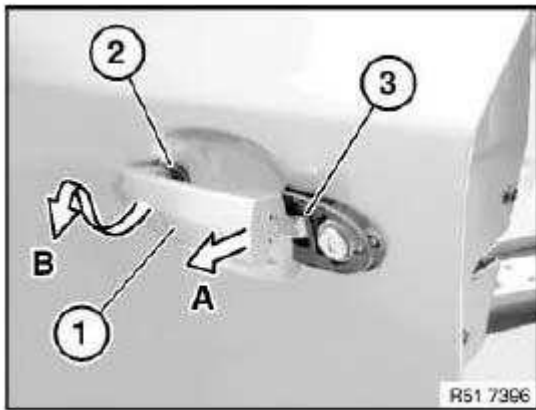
Outside Handle, Front Lock Actuator And Rear Lock Actuator
